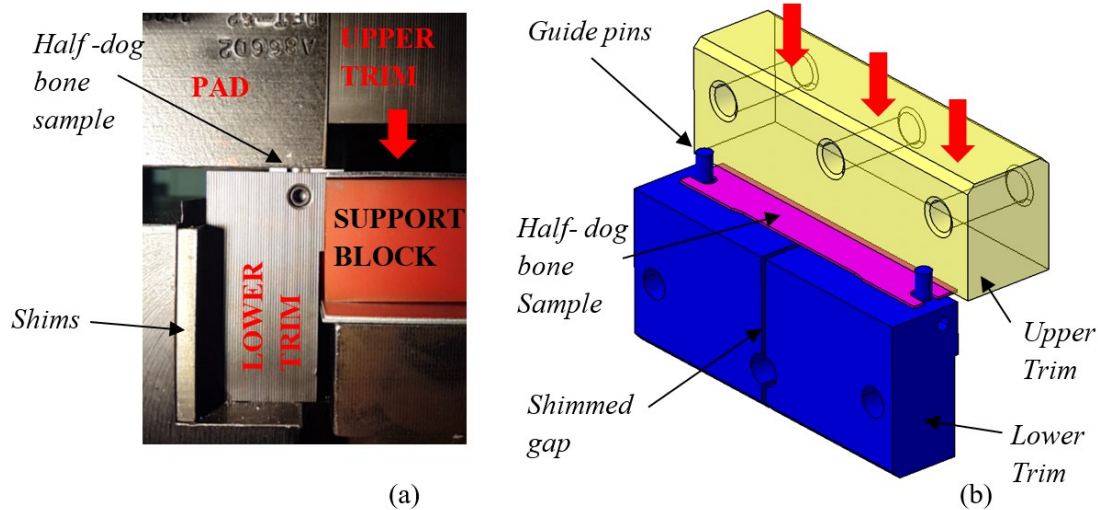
(a) Experimental press side view (b) Isometric view of laboratory trim tools with the gap in the lower tool and arrows indicating trimming operation.
